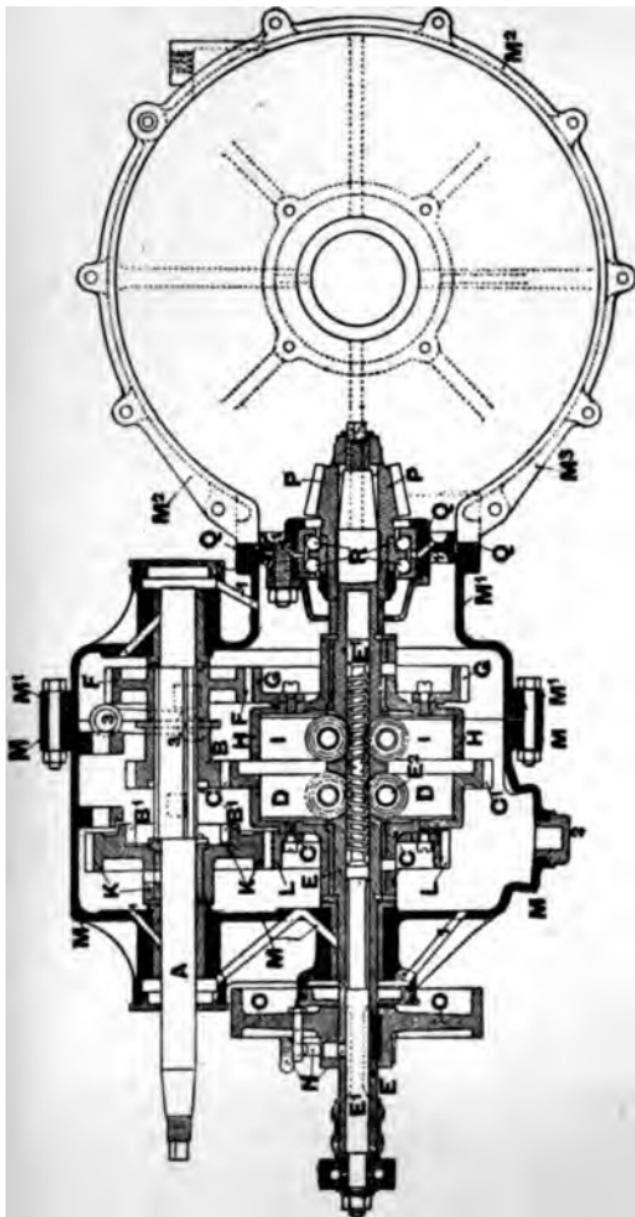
GENERAL ARRANGEMENT OF THE DE DION THREE-SPEED GEAR AND REVERSE
